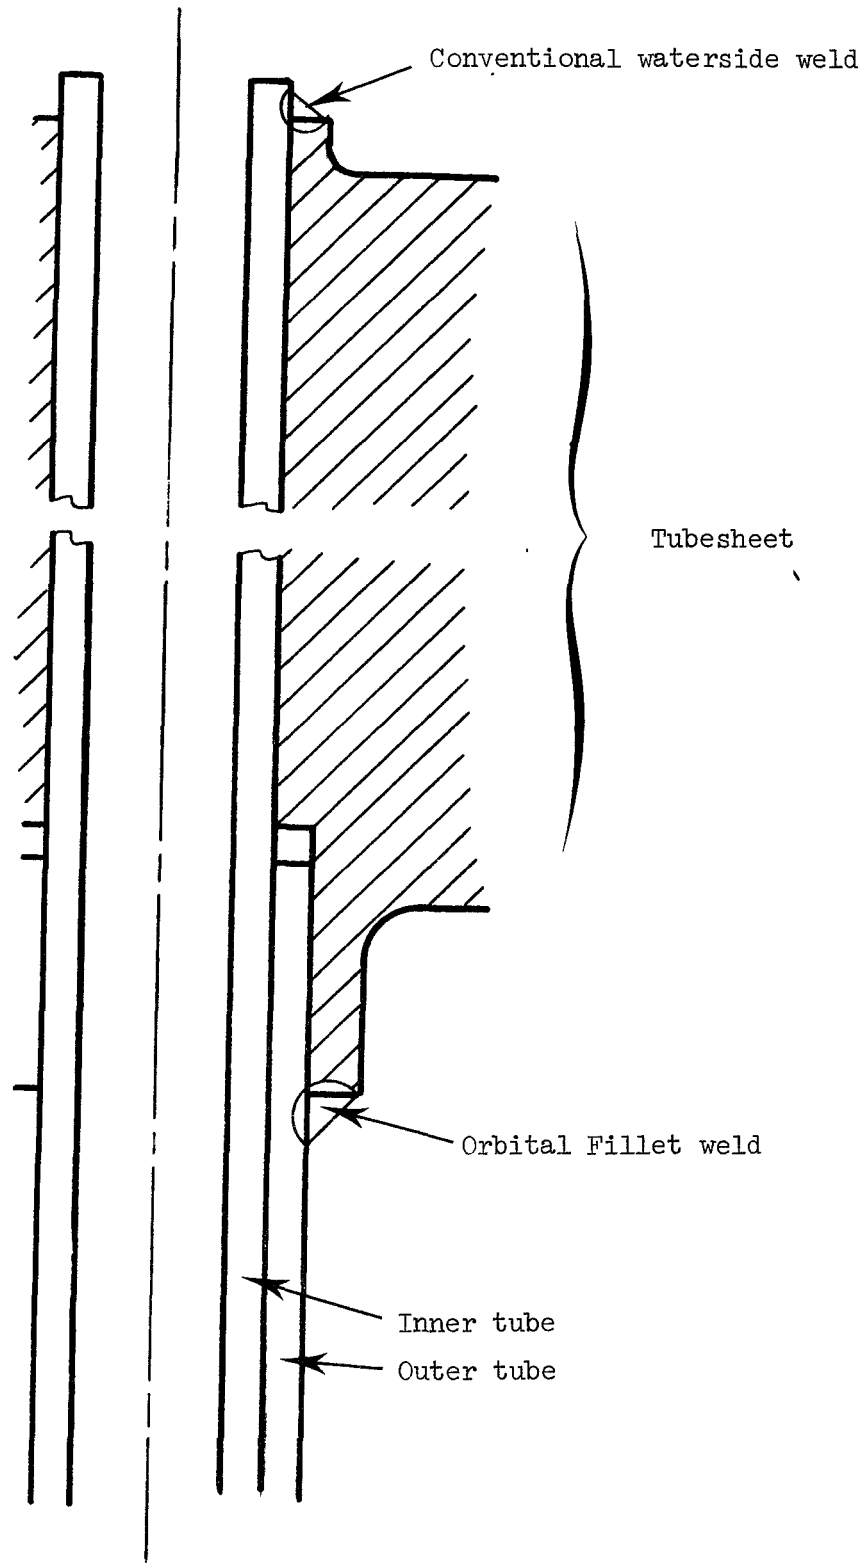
Orbital Weld for Double-wall tube/tubesheet joint
